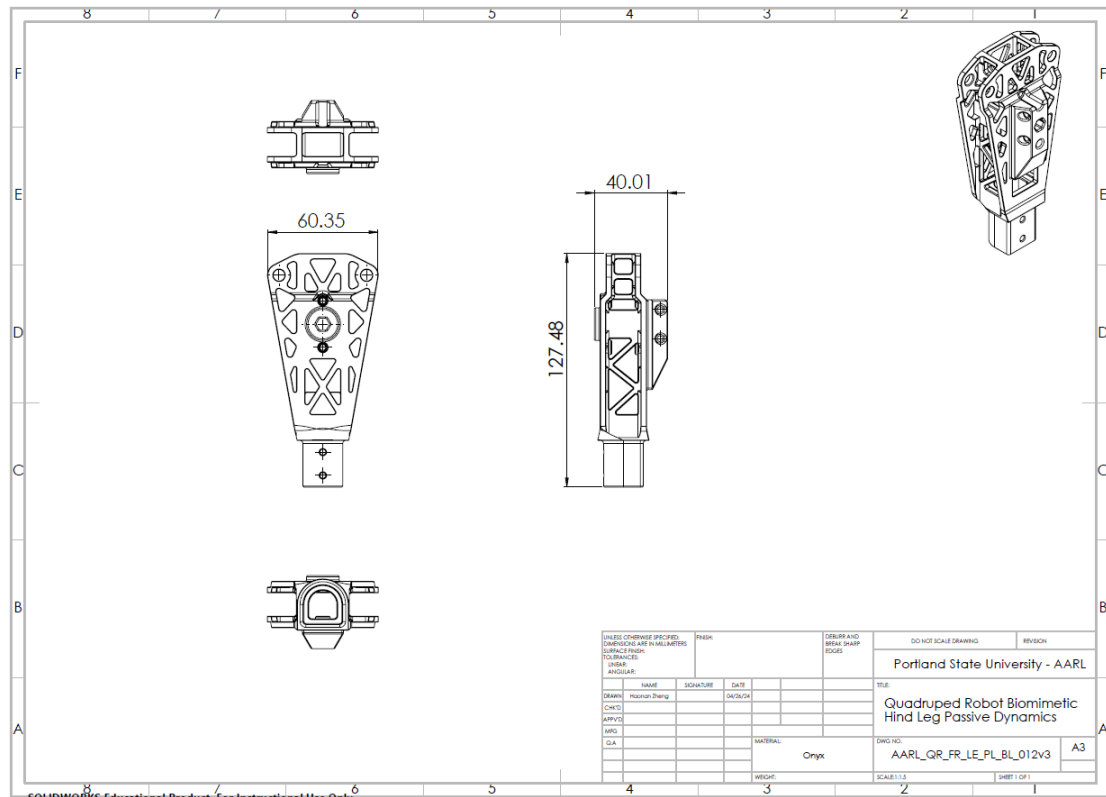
CAD drawing of revised link 1 for 3D printed hip spring assembly
